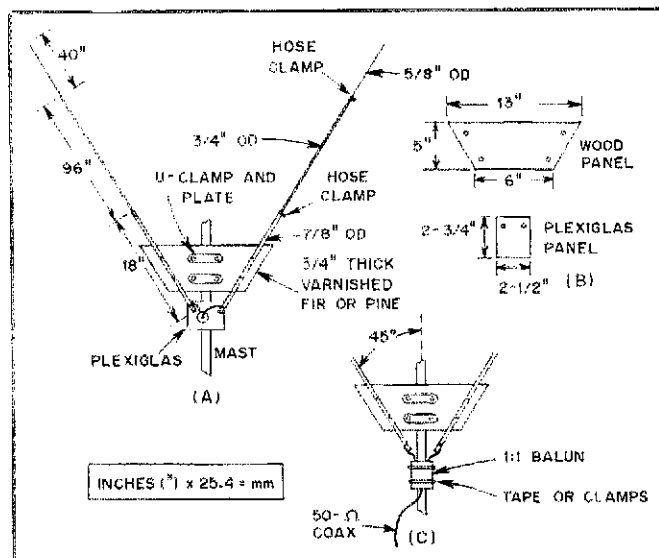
Construction details for the 15-meter vertical-V antenna. As indicated in section A, each element is bolted to the wood and Plexiglas panels. For the wooden panel use 1/4 x 2-1/4-inch bolts. For the Plexiglas panel use 1/4 x 1-1/2-inch bolts. Panel dimensions are shown at B. Part C shows the angle for the elements and the position for the balun. Both elements are individually adjusted to a length of 135.7 in (3.446 m) for resonance at 21.225 MHz.
